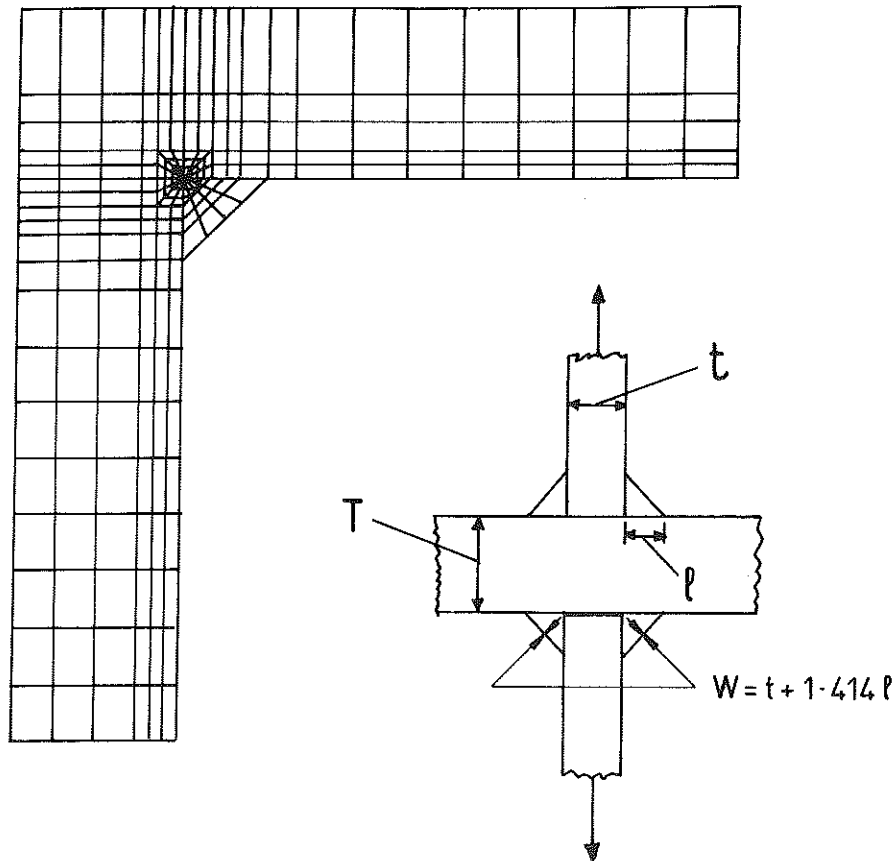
Typical finite element mesh for cruciform fillet welded joints
